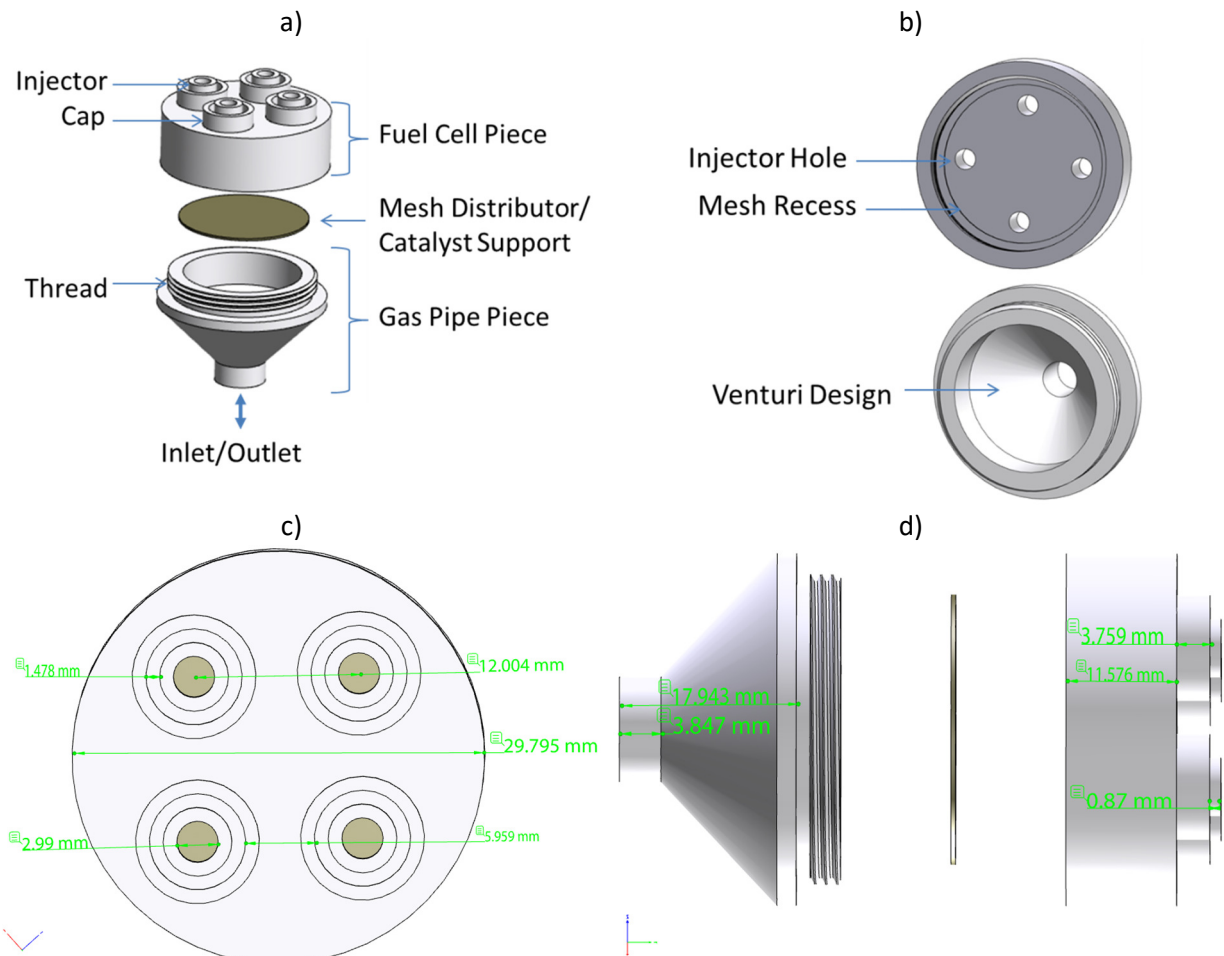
4-cell manifold CAD view in a) annotated exploded view, b) annotated inside view, c) fuel cell piece top view with measurement, d) exploded side view with measurement.
